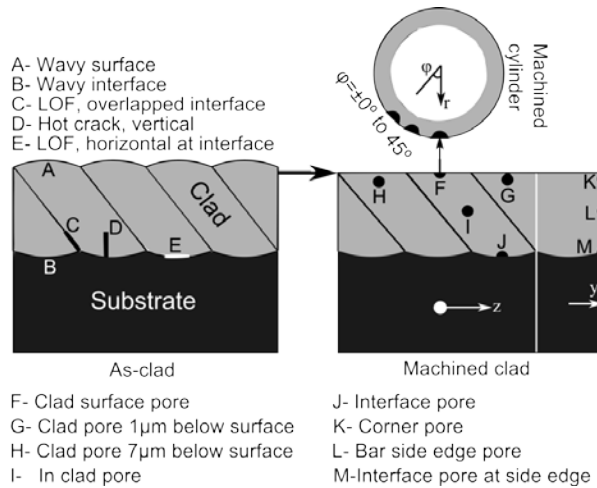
Illustration of the laser clad layer cross section (left as-clad and right after machining) with the variety of possible defects and their positions
